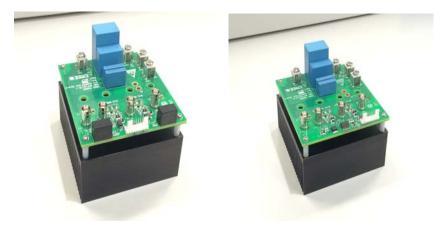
Cree EVL board assembly (-1 is shown on left). See Appendix for assembly parts information.
